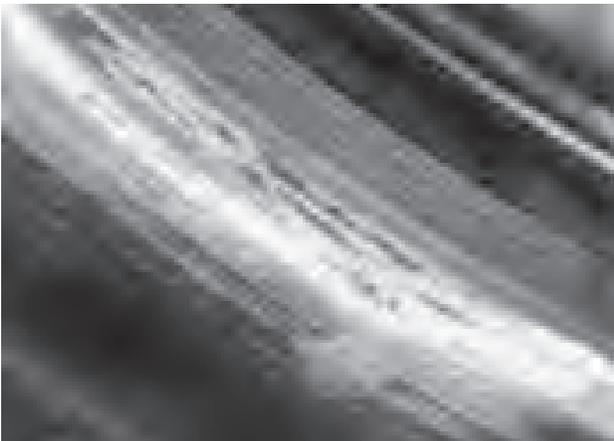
Corrosion on Outer Ring Raceway of Deep Groove Ball Bearing
